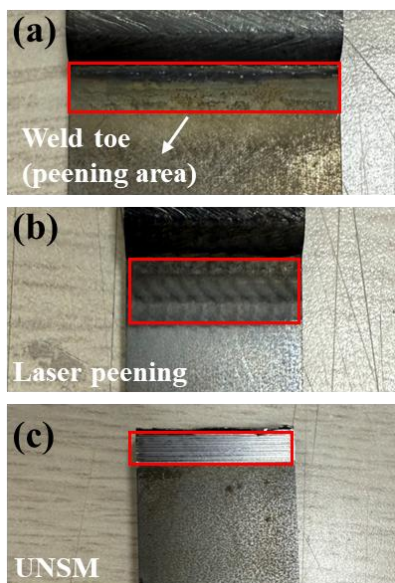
Images of the weld toe region of lap-welded DP600 joints: (a) as-welded, (b) laser peened, and (c) UNSM-treated conditions
